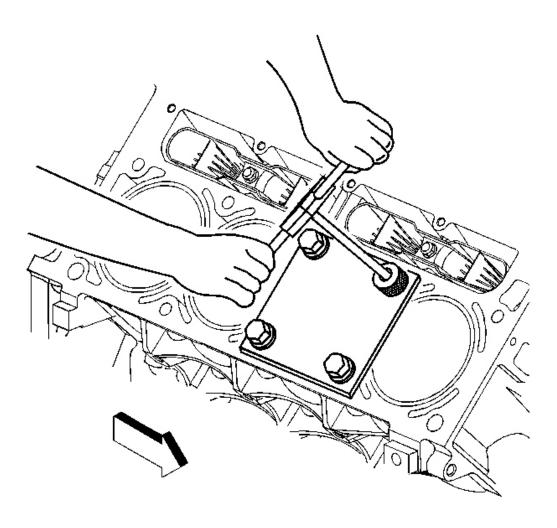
Tapping Threads Of Drilled Hole Using Tapping Wrench Courtesy of GENERAL MOTORS CORP.
